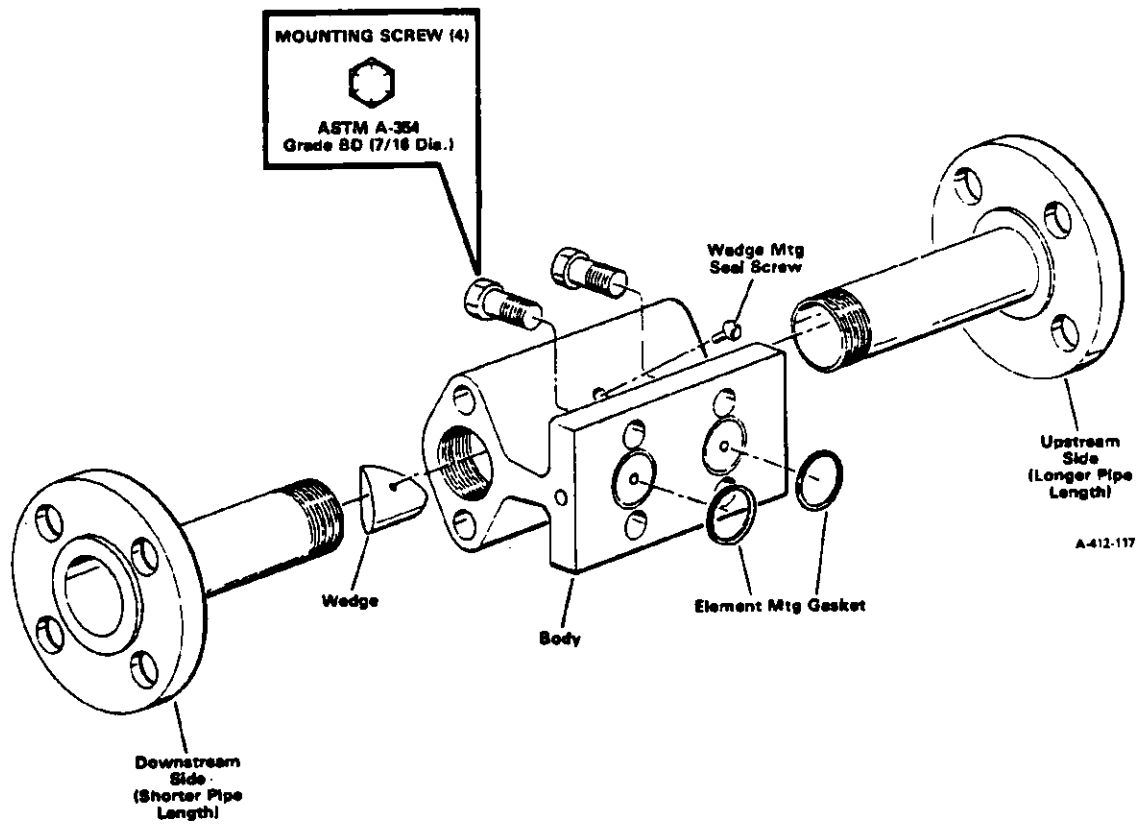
Exploded View of Integral WEDGE Flow Element
